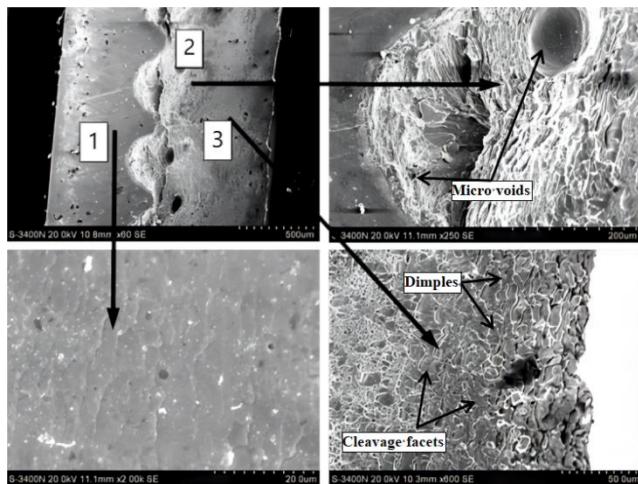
Fracture morphology of tensile specimens with a heat input of 1.5 kJ/cm
